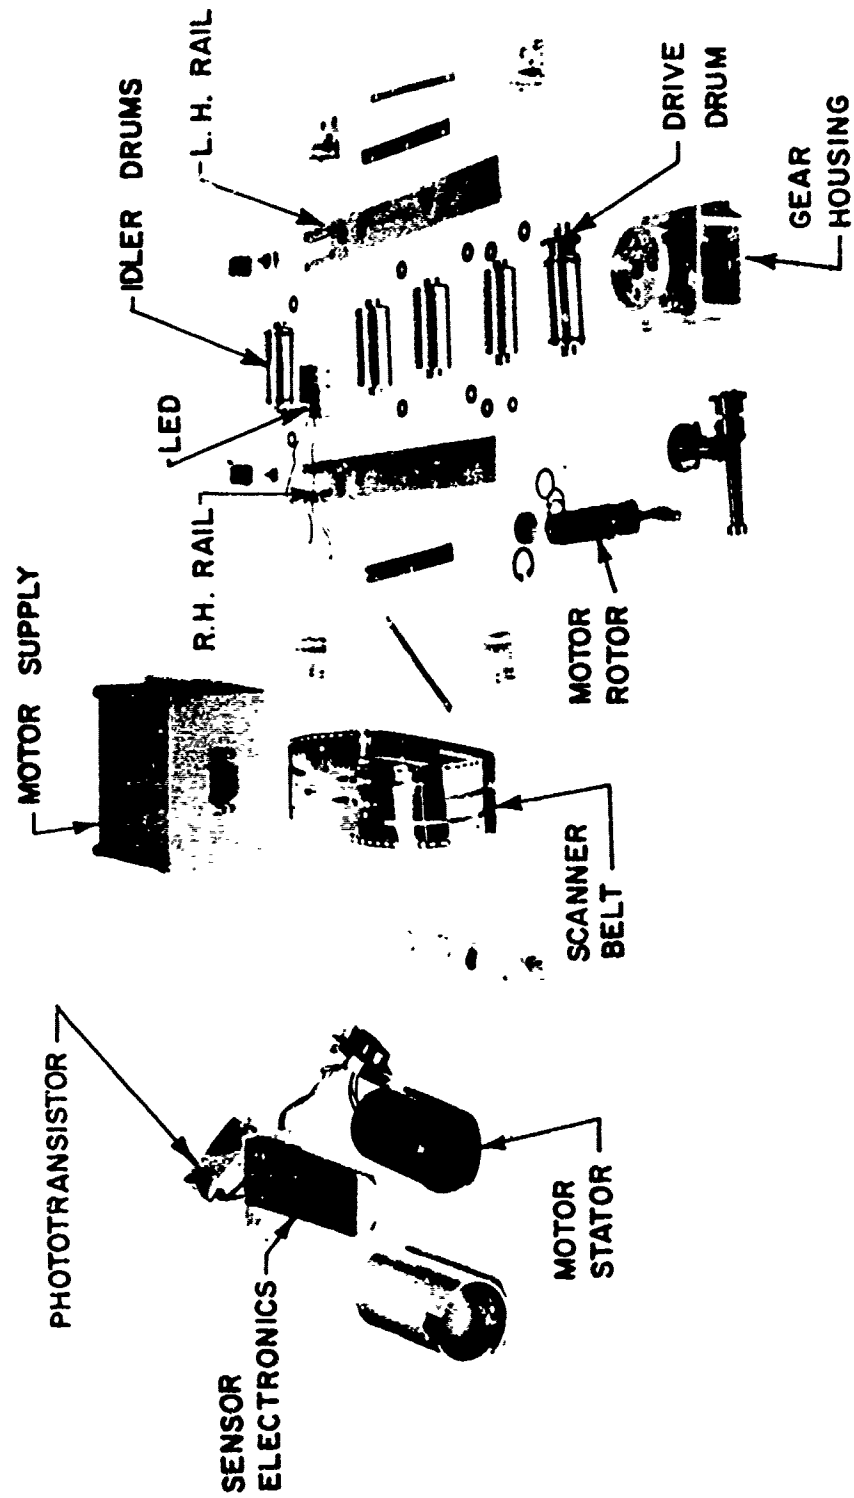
DISASSEMBLED BELT SCANNER SYSTEM
